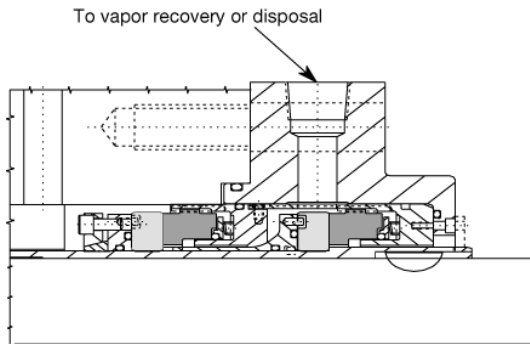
Early non-contacting gas-lubricated seal design for vaporizing hydrocarbon service (John Crane Inc.)
